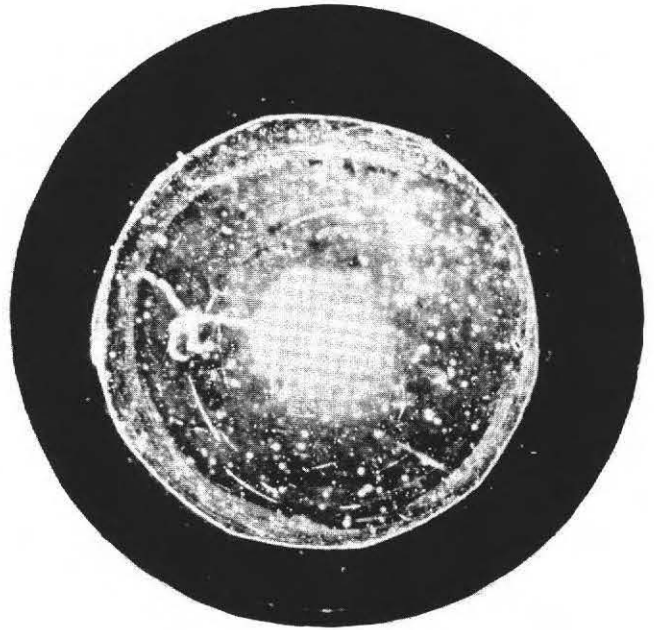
Enlarging lens 2 in. $f/4.5$
